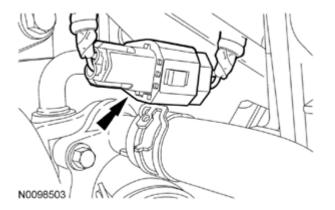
Locating Knock Sensor (KS) Electrical Connector Courtesy of FORD MOTOR CO.
